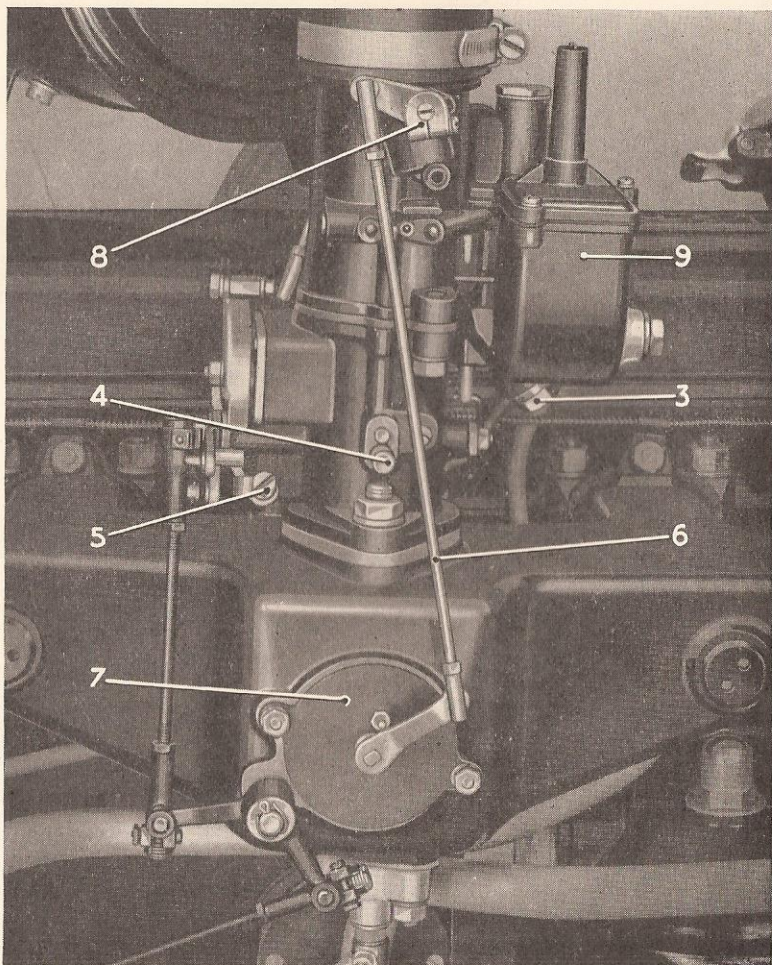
THE CARBURETTER—RIGHT-HAND SIDE.
